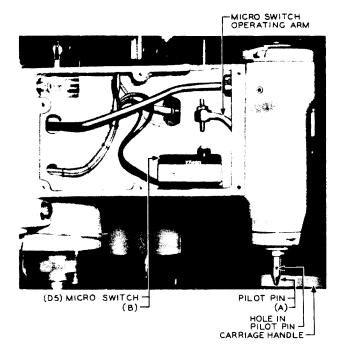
Hole-Enlarging Control Unit — 659A and 659D Tools (cover removed)
